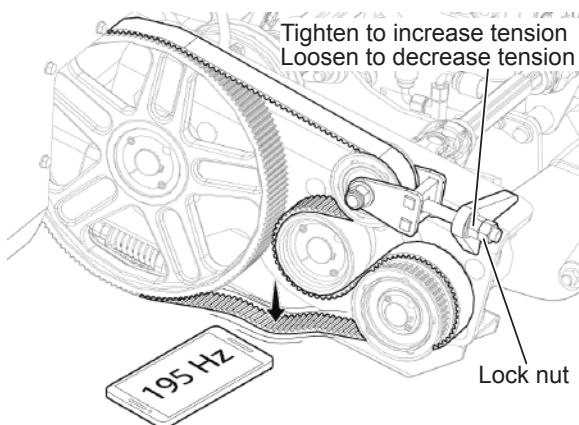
Feed Auger Drive Belt Tension Adjustment
